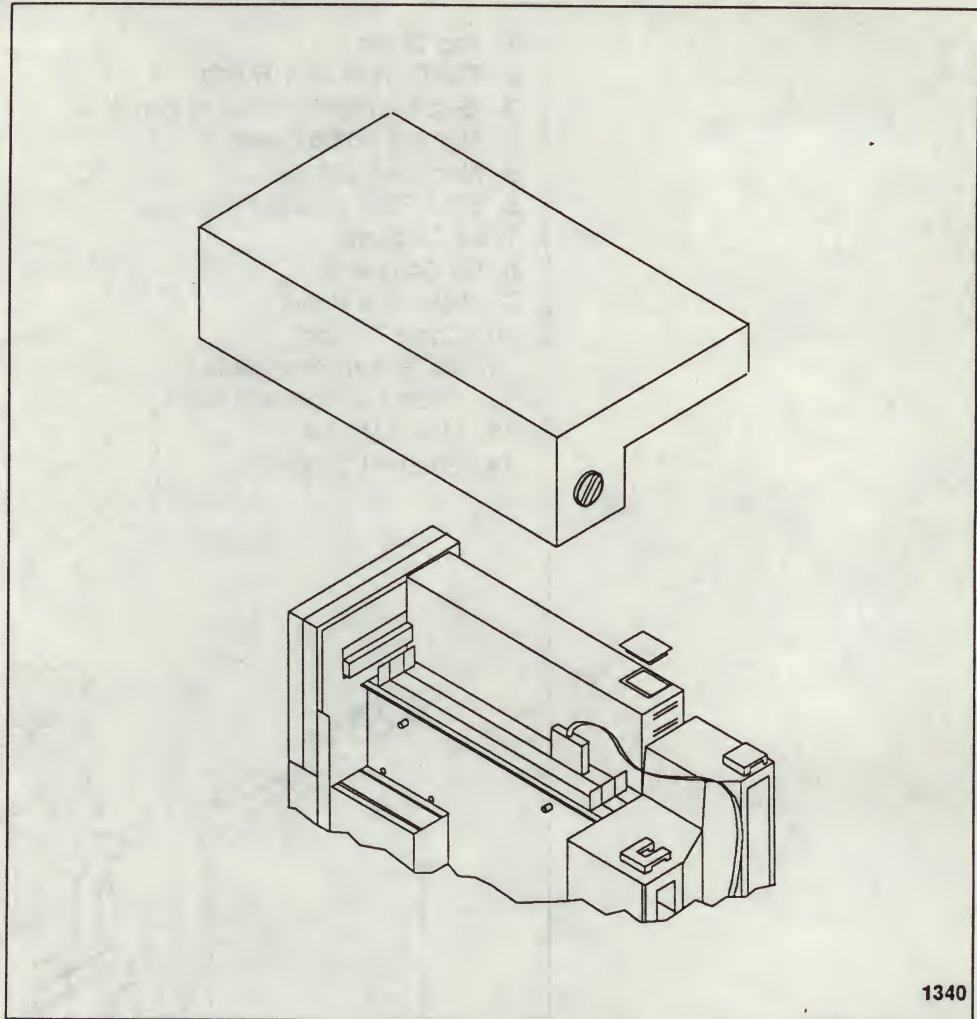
shows the system with the top cover removed and the PC boards exposed.
